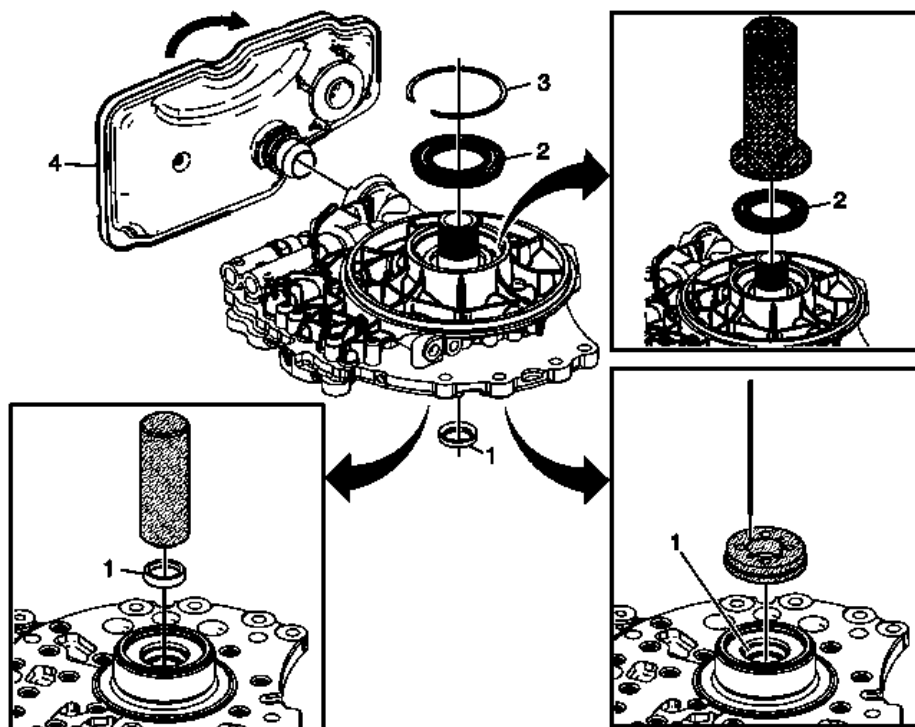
View Of Torque Converter Fluid Seal & Fluid Filter Assembly
